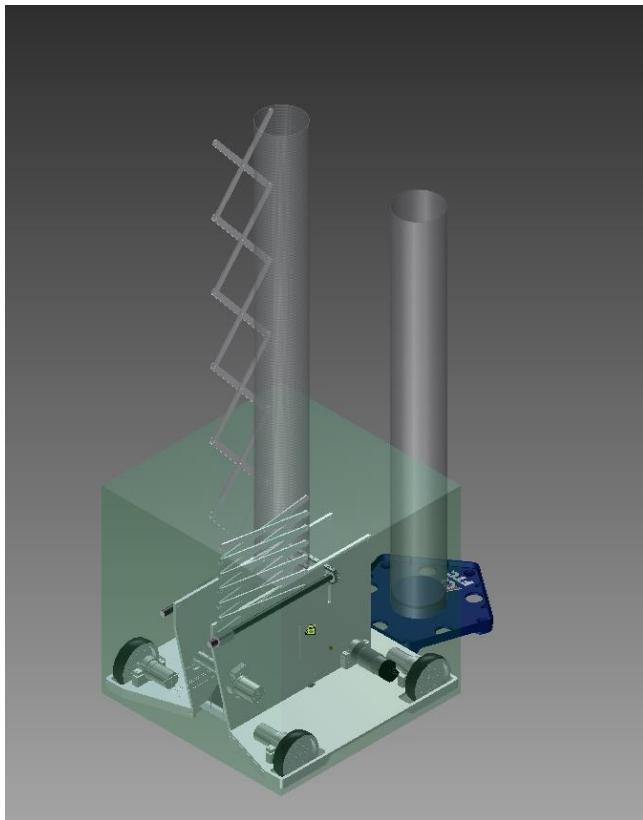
CAD/Ball Holder and Base and 18x18 Sizing
